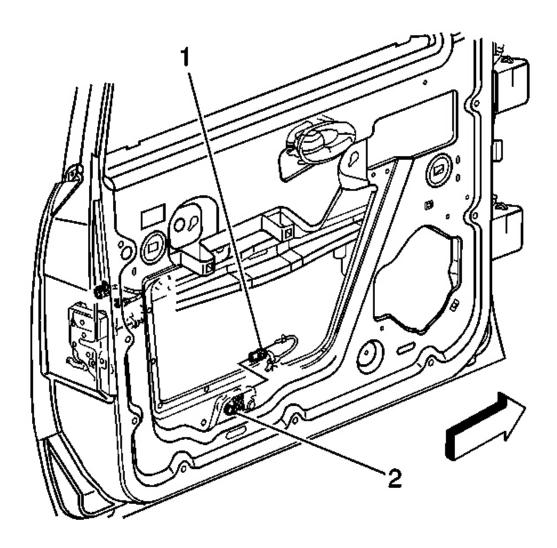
Removing/Installing Side Impact Sensor Courtesy of GENERAL MOTORS CORP.
